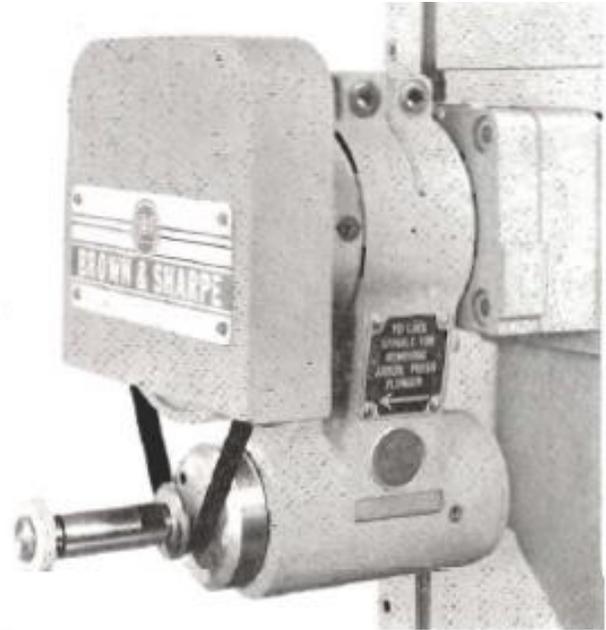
High Speed Surface Grinding Attachment. Wheel arbors and grinding wheels are furnished at extra cost.
